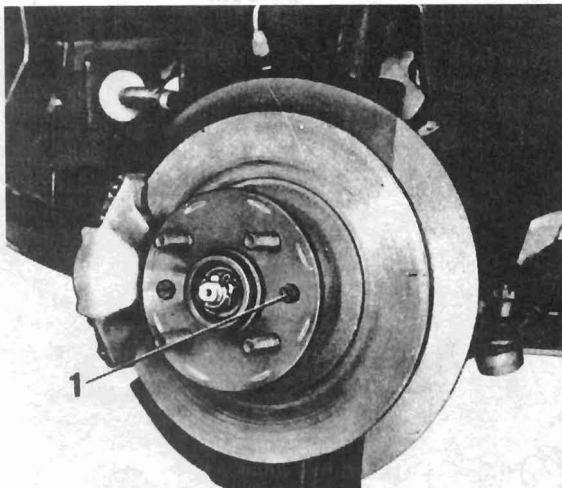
Hub-to-disc retaining screw (1) (Sec 5)
